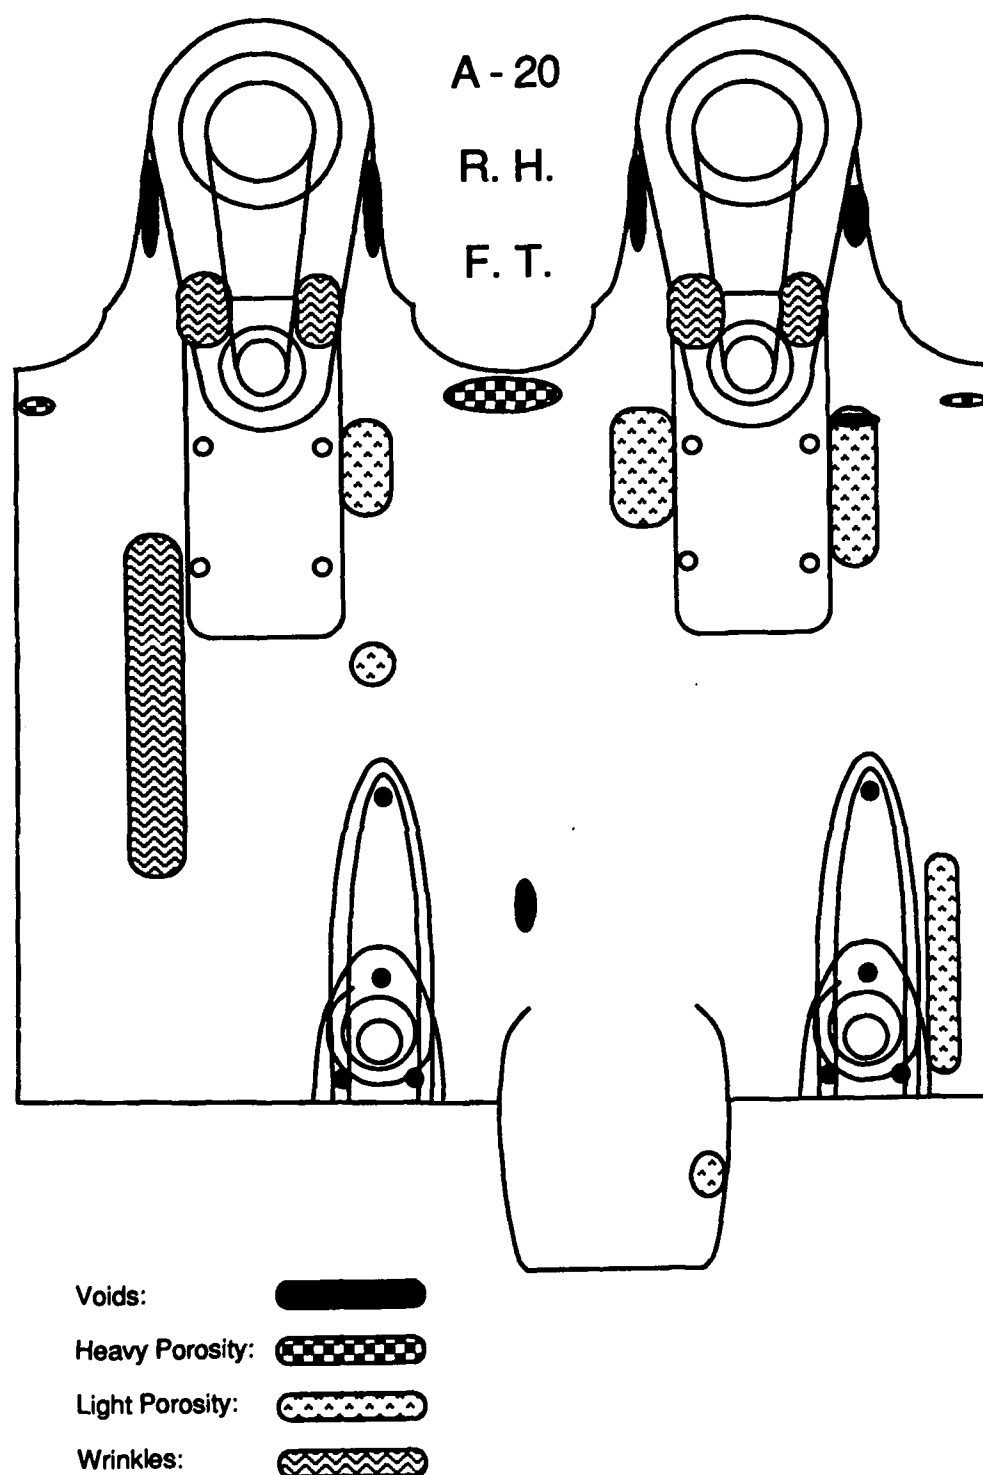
Unfolded overlay drawing of V-22 rotor grip
